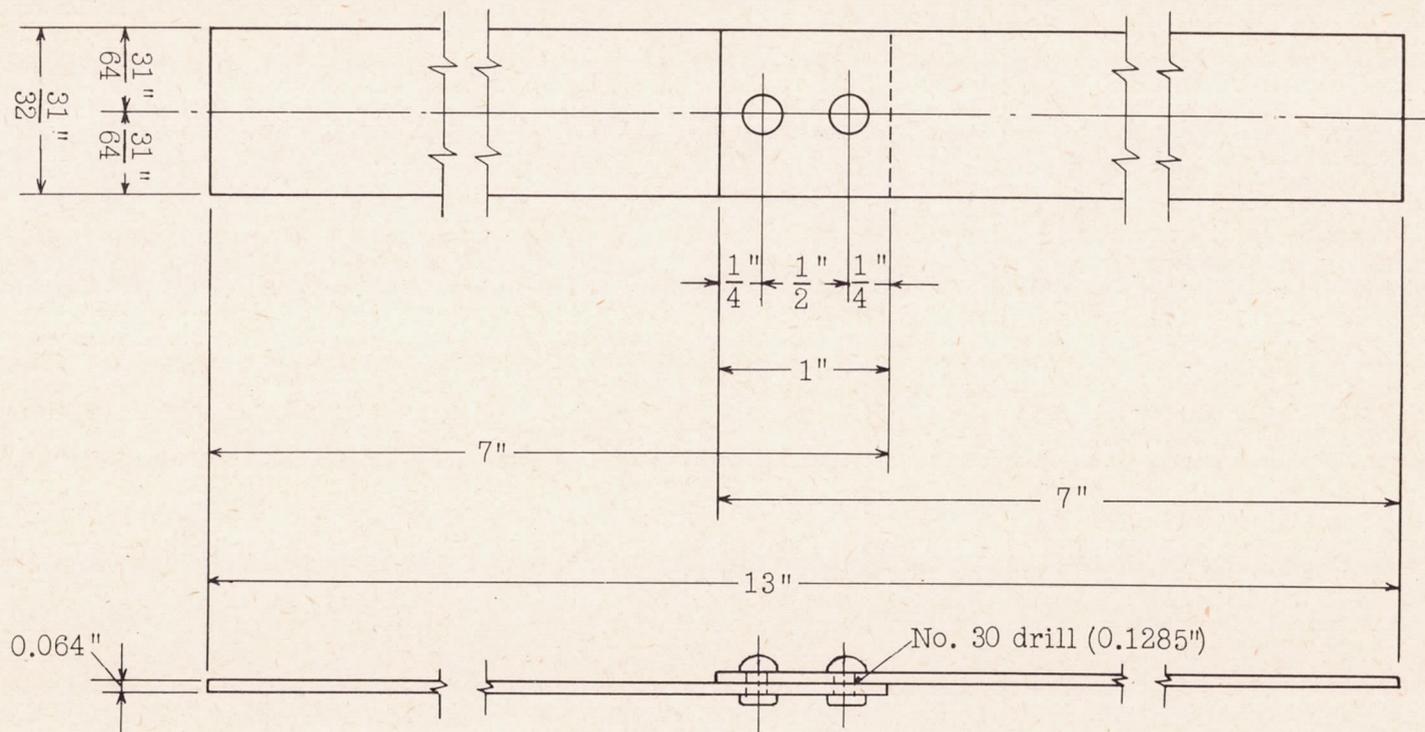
Shear specimen for $\frac{1}{8}$ -inch rivets.
